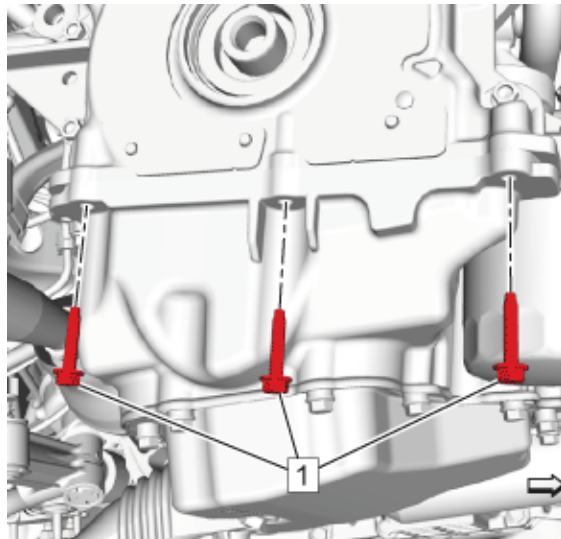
Oil Pan Bolts And Upper Oil Pan
